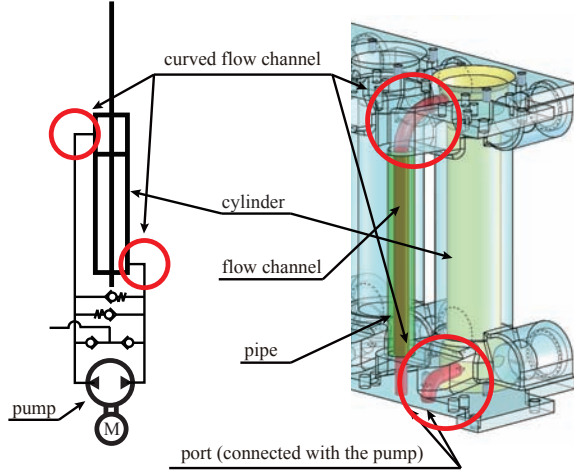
The Cylinder Manifolds are Casted to Shape Curved Flow Channels. The direct casting technique enables curved flow channels, which have less hydraulic friction than right-angle corner.
